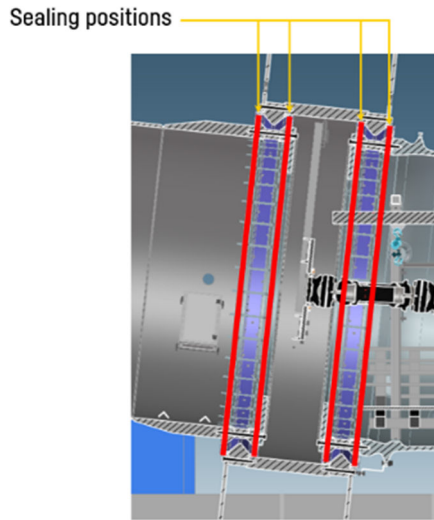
Possible seal installation positions on Main Bearing Test Rig 2
